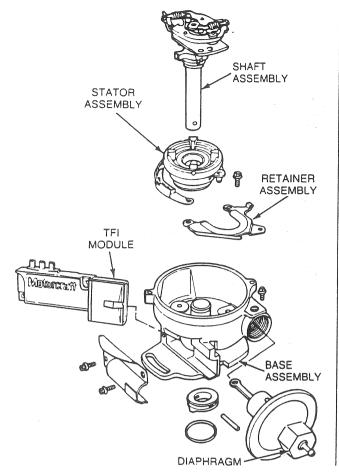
Second-generation distributor assembly. (Courtesy of Ford Motor Co.)
